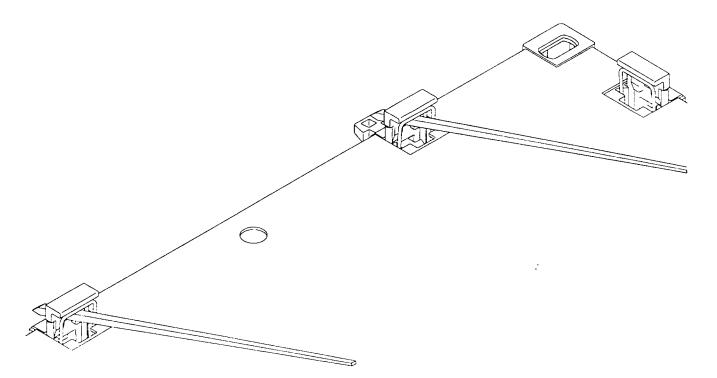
Guillotine Bar in the Fully Elevated Position.
